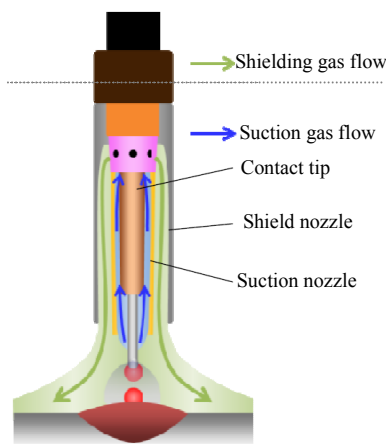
Welding-torch structure used in low-hydrogen welding process<sup>4)</sup>
